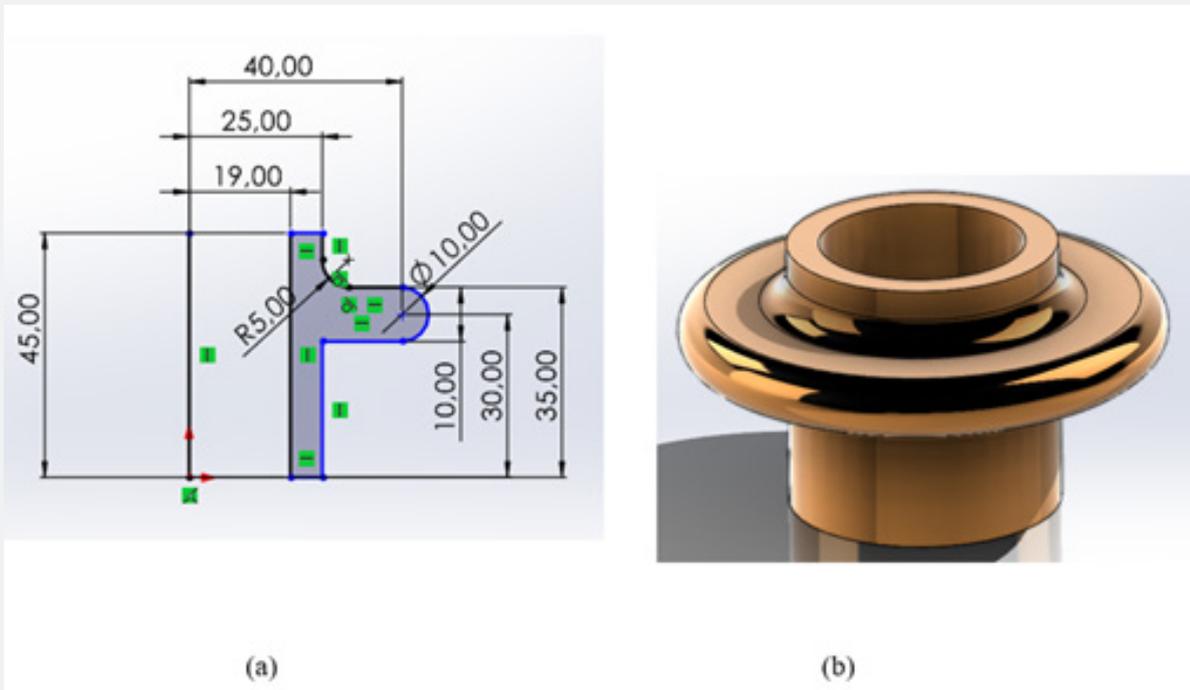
Nut (Part-2) design: (a) Dimensional 2D view, (b) 3D CAD model.
